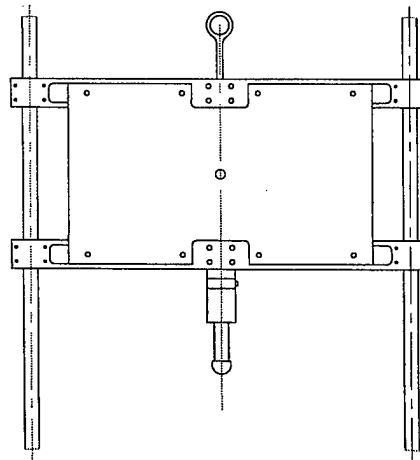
HEAVY WEIGHT IMPACTOR ASSEMBLY-II
